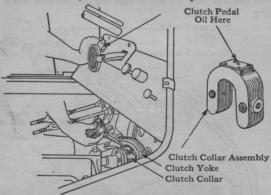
Lubricating clutch collar, Model Four-Ninety, Superior and G
